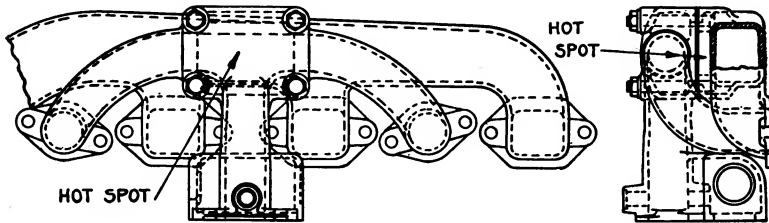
B. Hot Spot Manifold Arrangement on Hinkley Truck Engine
